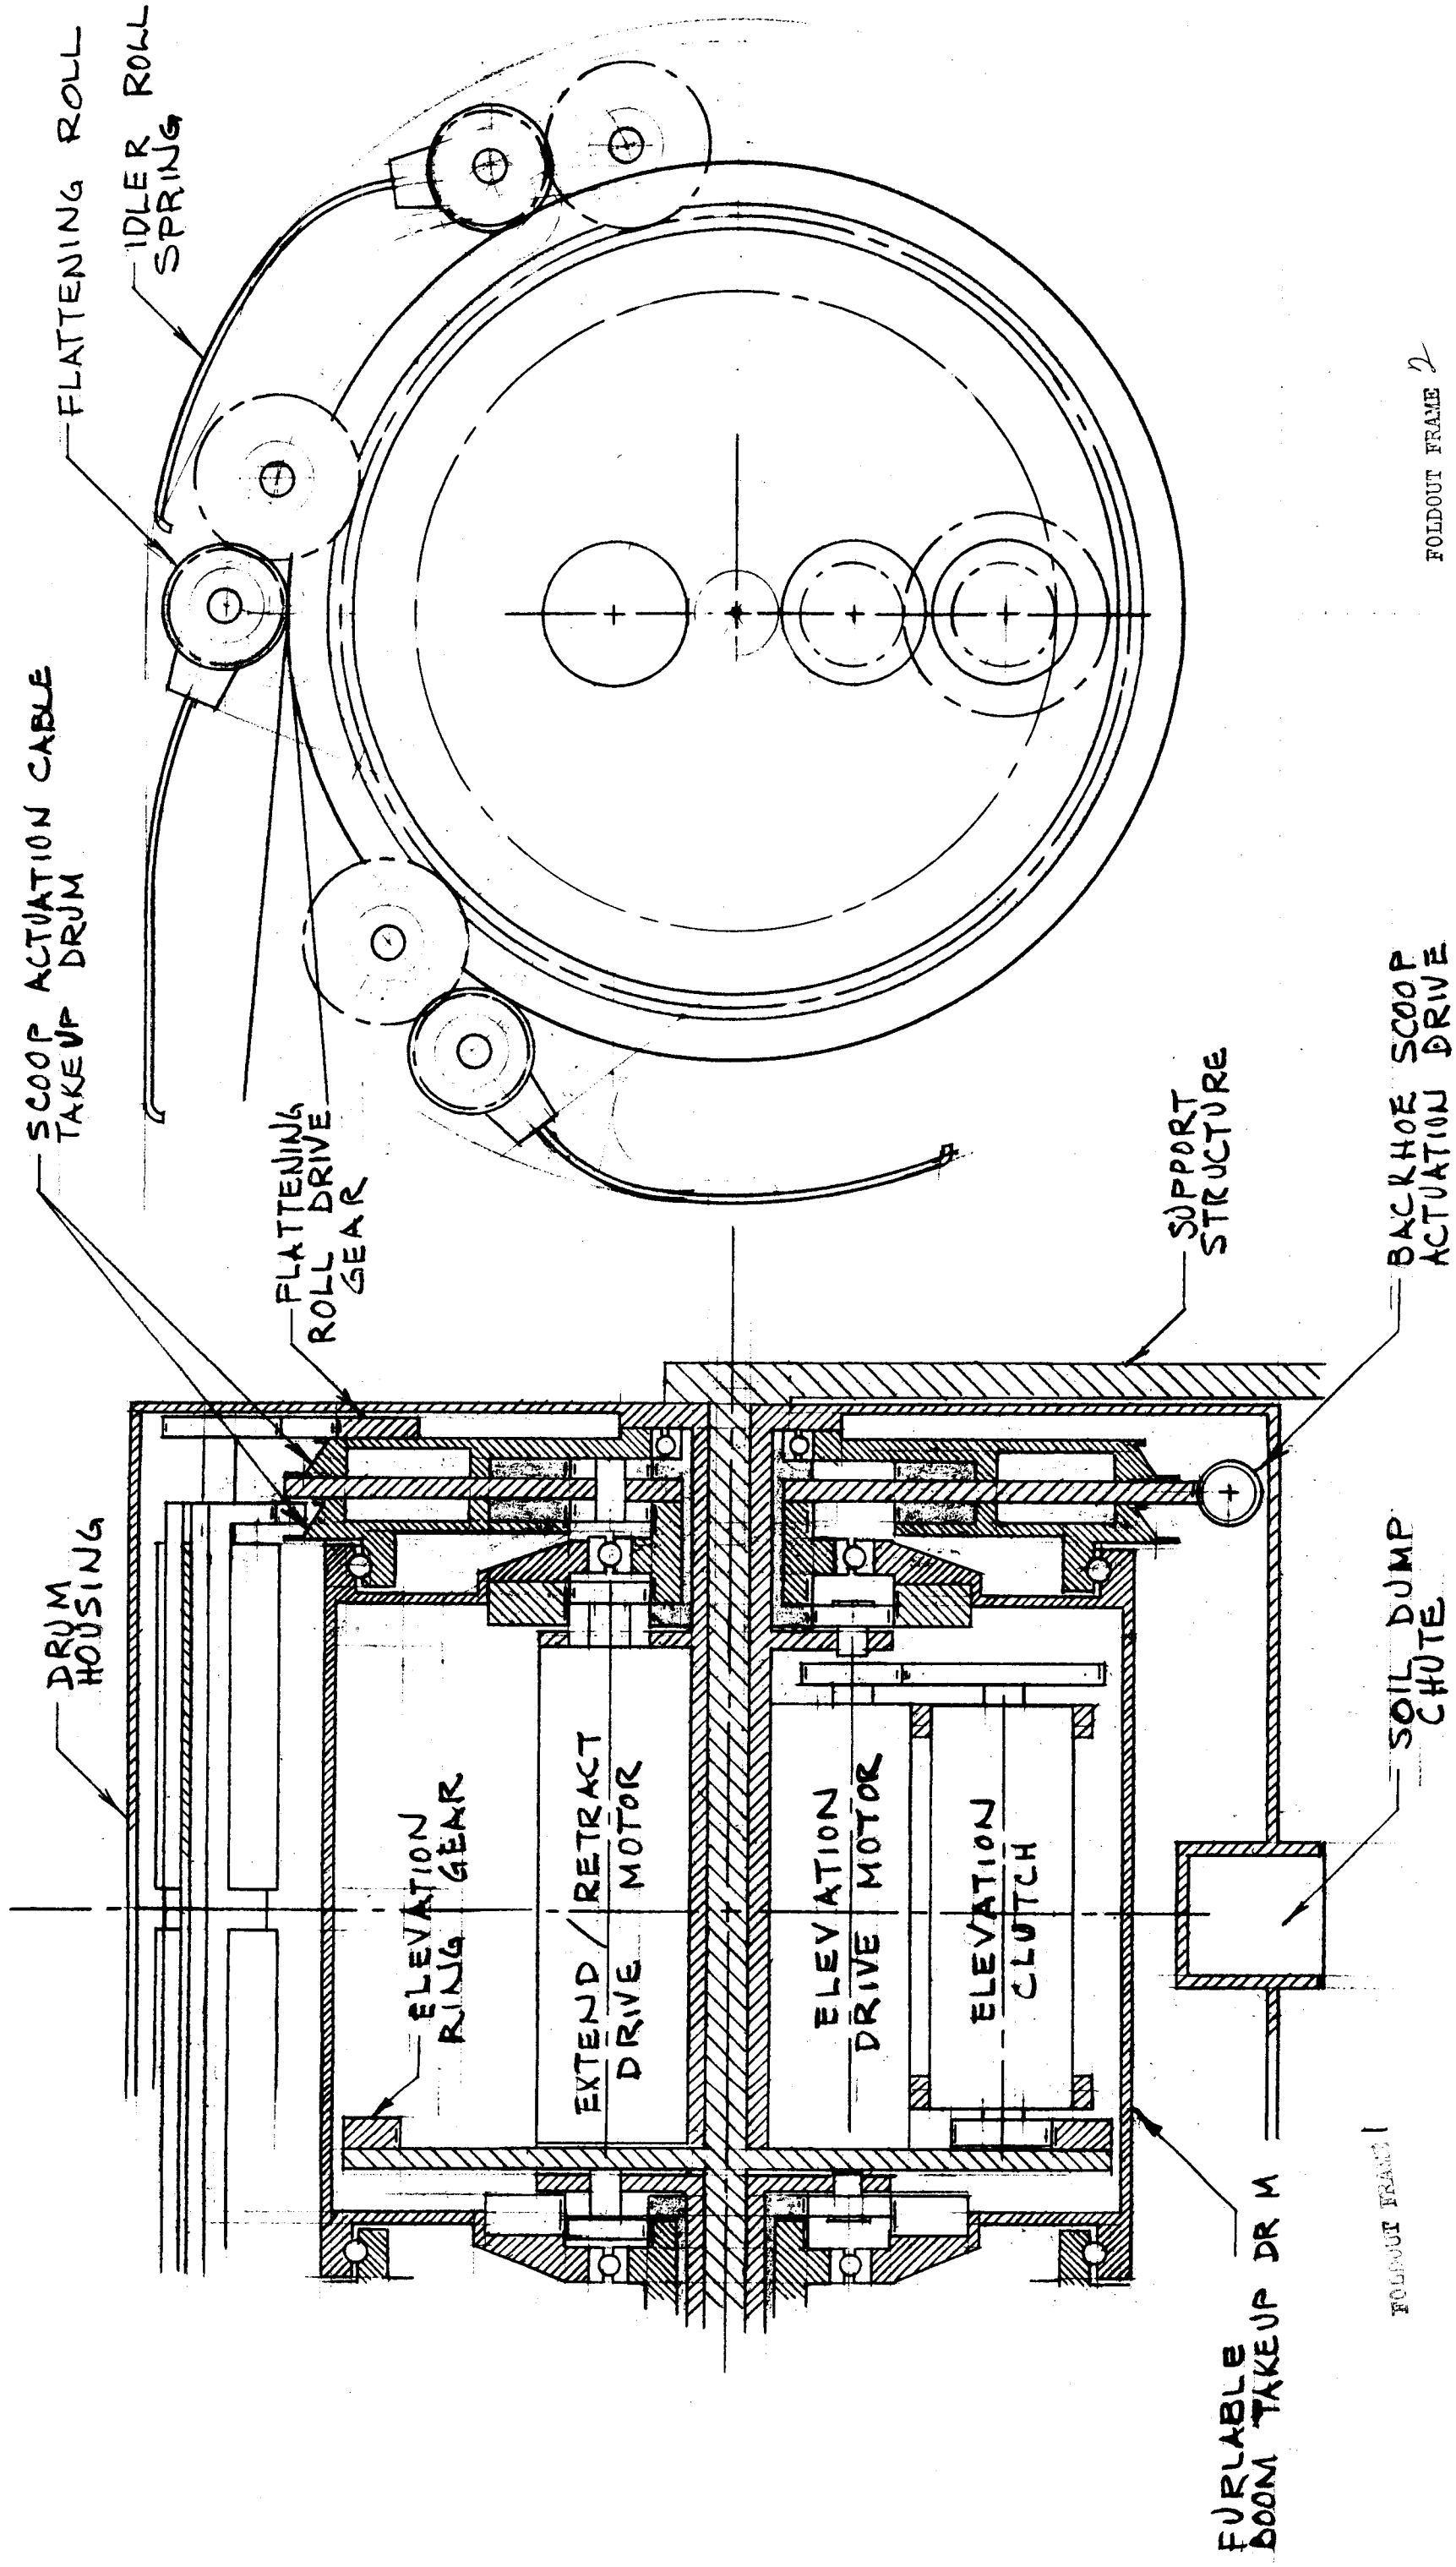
FURLABLE BOOM DRIVE CONCEPT
